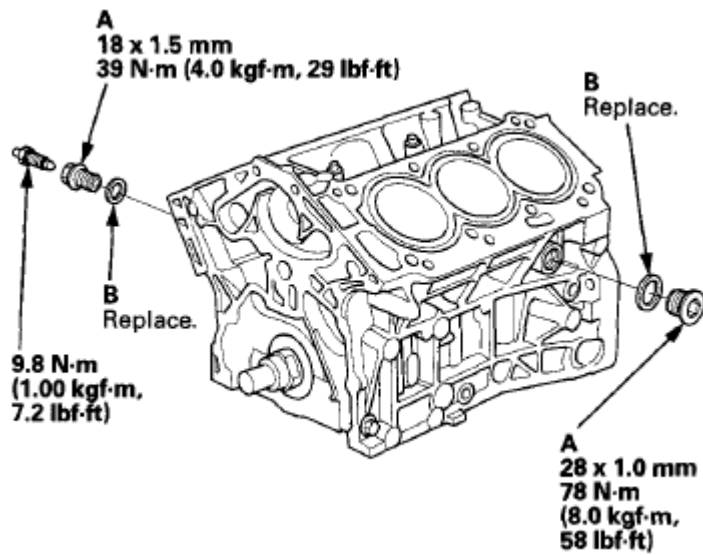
Identifying Sealing Bolt With Torque Specifications
